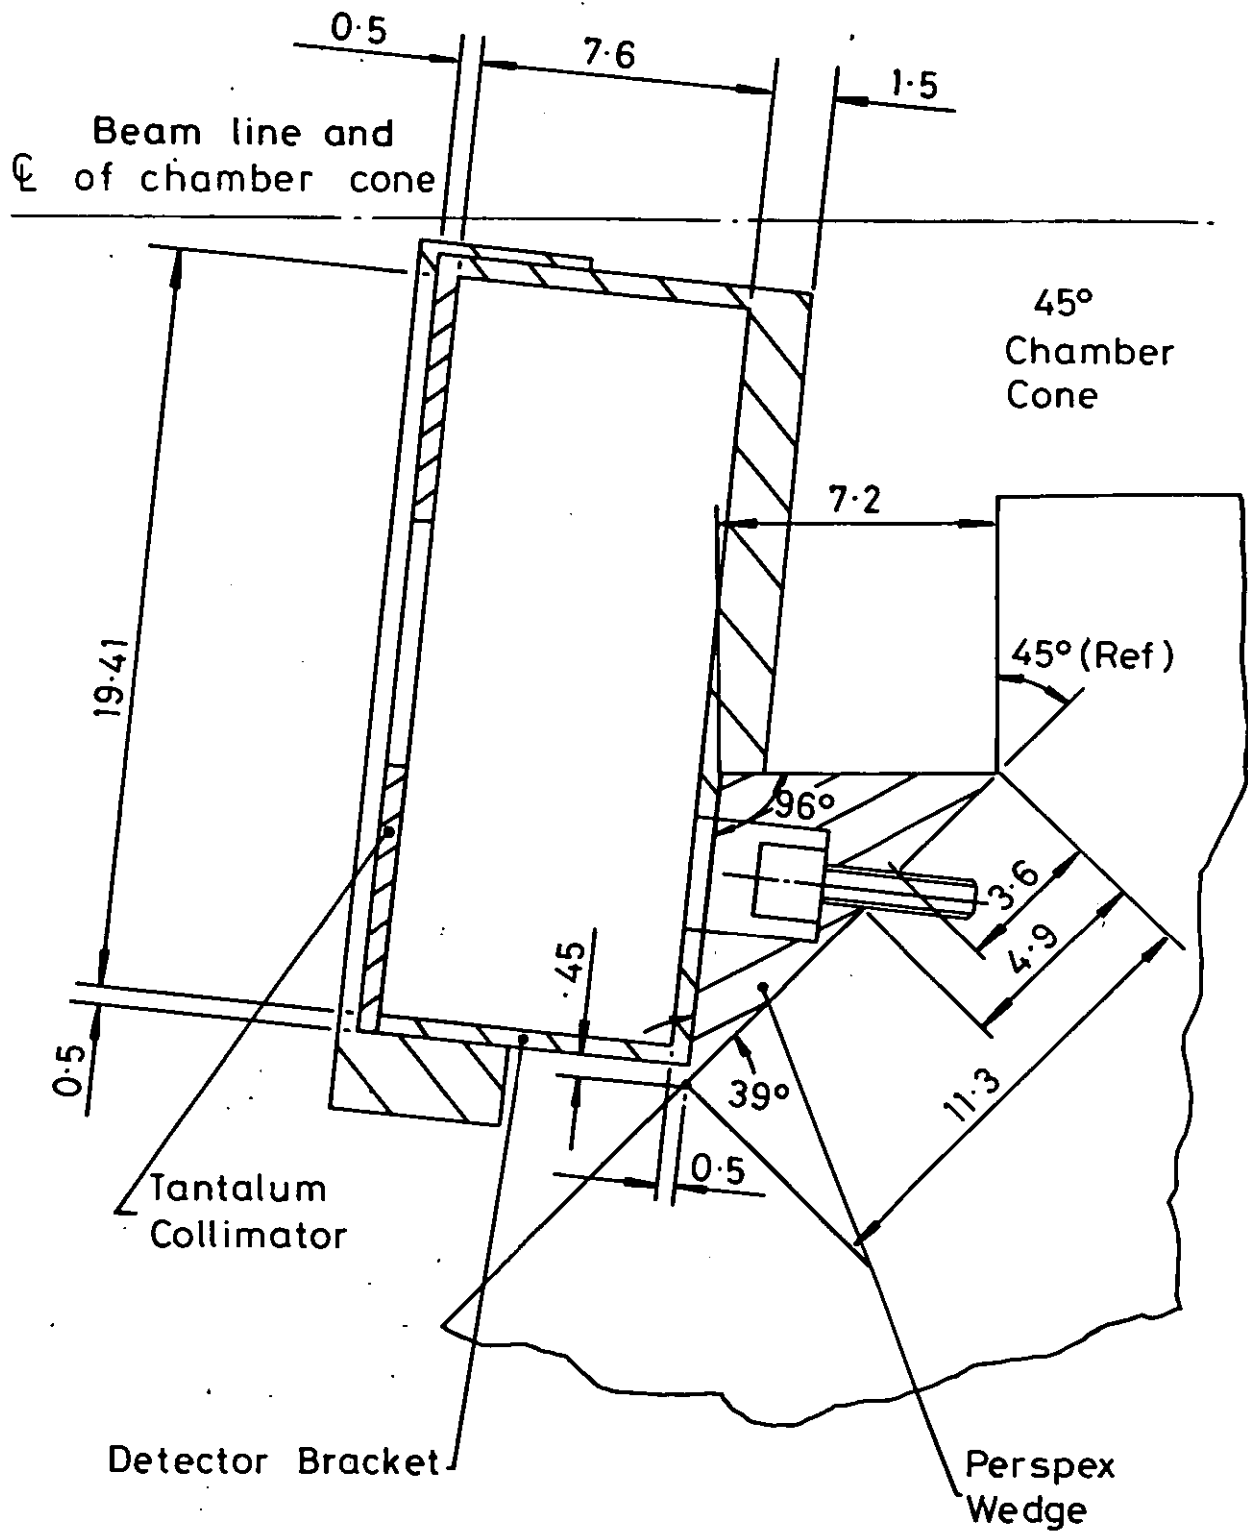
SECTIONAL VIEW OF DETECTOR HOLDER AND COLLIMATOR ASSEMBLY IN HORIZONTAL PLANE OF THE BEAM.
